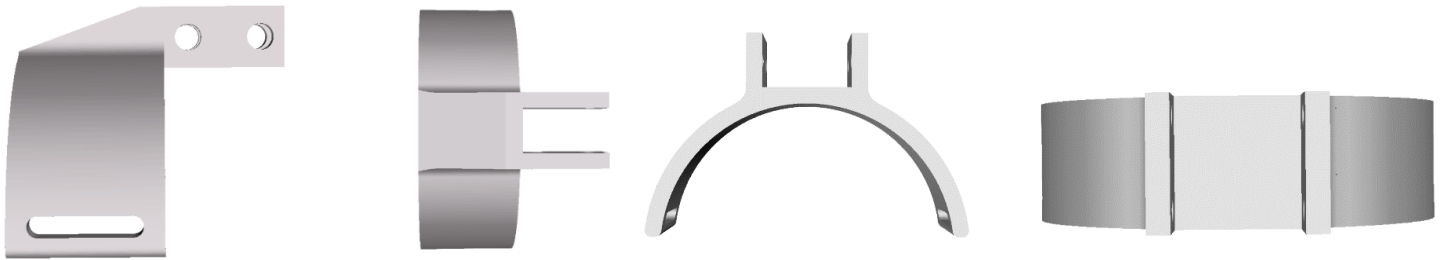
Front & Top View of Lower & Upper Arm Cuffs
